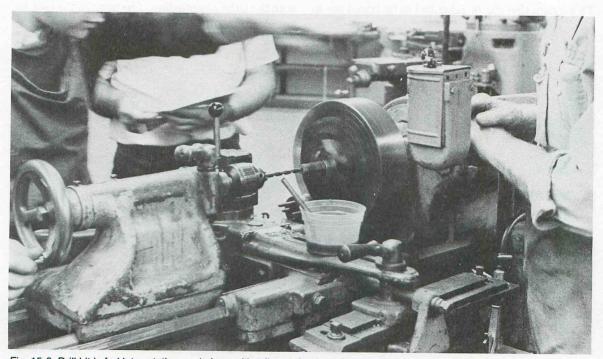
Drill bit is fed into rotating workpiece with tailstock feed wheel. Drill bit is withdrawn frequently to remove chips.
